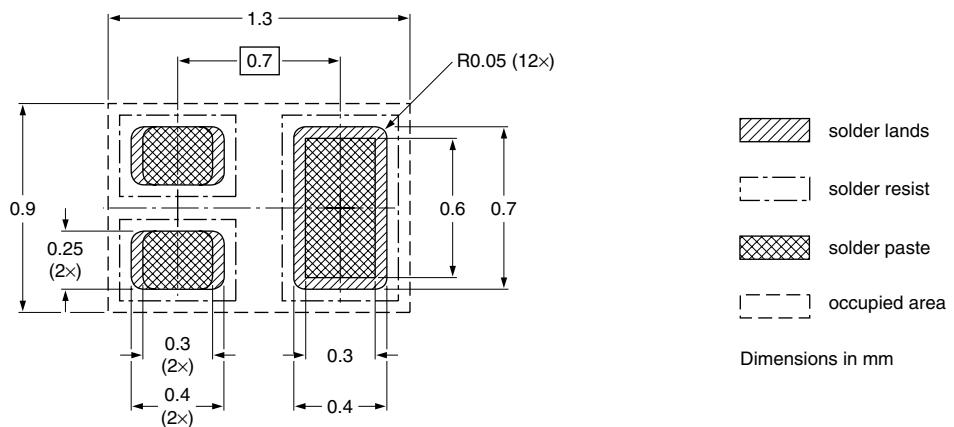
Reflow soldering footprint for SOT883 (SOT883)
